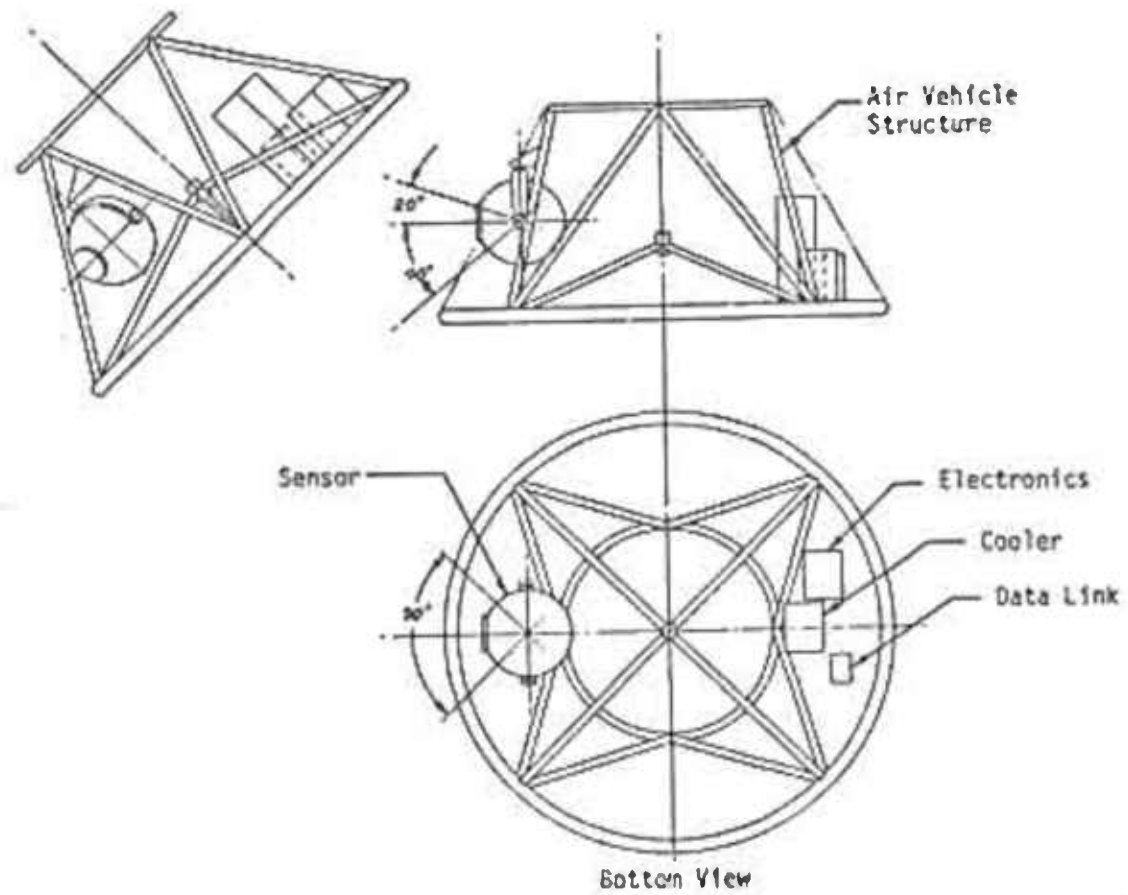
Typical Installation of Stabilized Imaging Sensor.
